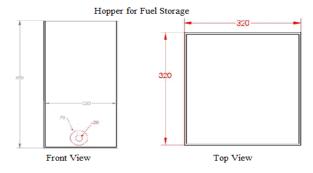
view of the fuel hopper (All dimensions in mm)
